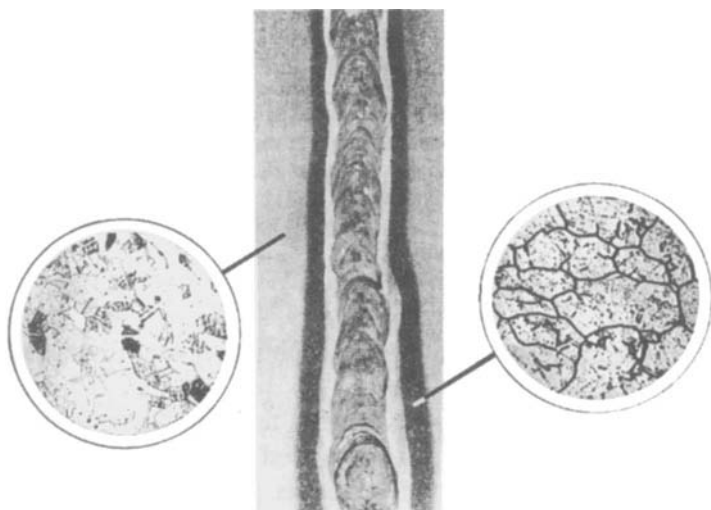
The appearance and location of carbide-rich zones bordering a weld bead in 304 stainless steel. The sample has been etched to make the carbide-rich regions visible. The dark zones on either side of the weld are regions in which the metal cooled from 900°C to 500°C in more than 5 min. The right inset shows a magnified view of the carbide-rich zone. The left inset shows a magnified view of the grain structure of normal annealed 304 stainless steel. Reprinted with permission from *Stainless Steel Fabrication*, Allegheny Ludlum, Pittsburgh. Copyright 1959, Allegheny Ludlum Steel Company.
